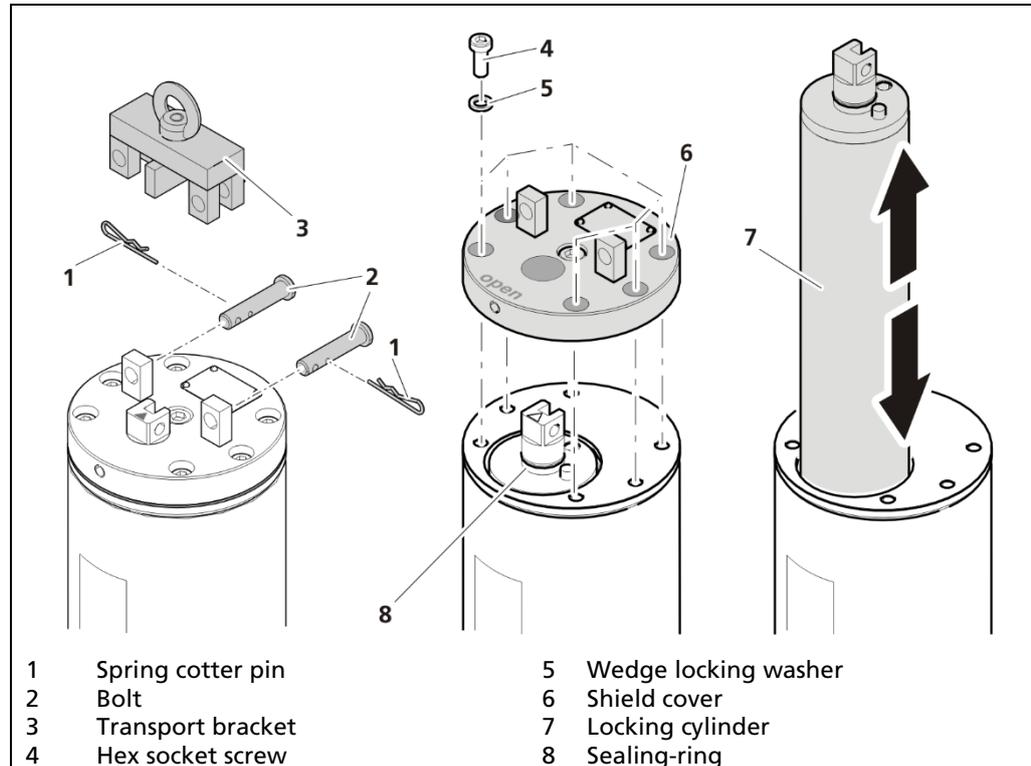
Dismounting and mounting the locking cylinder of a operation shield
